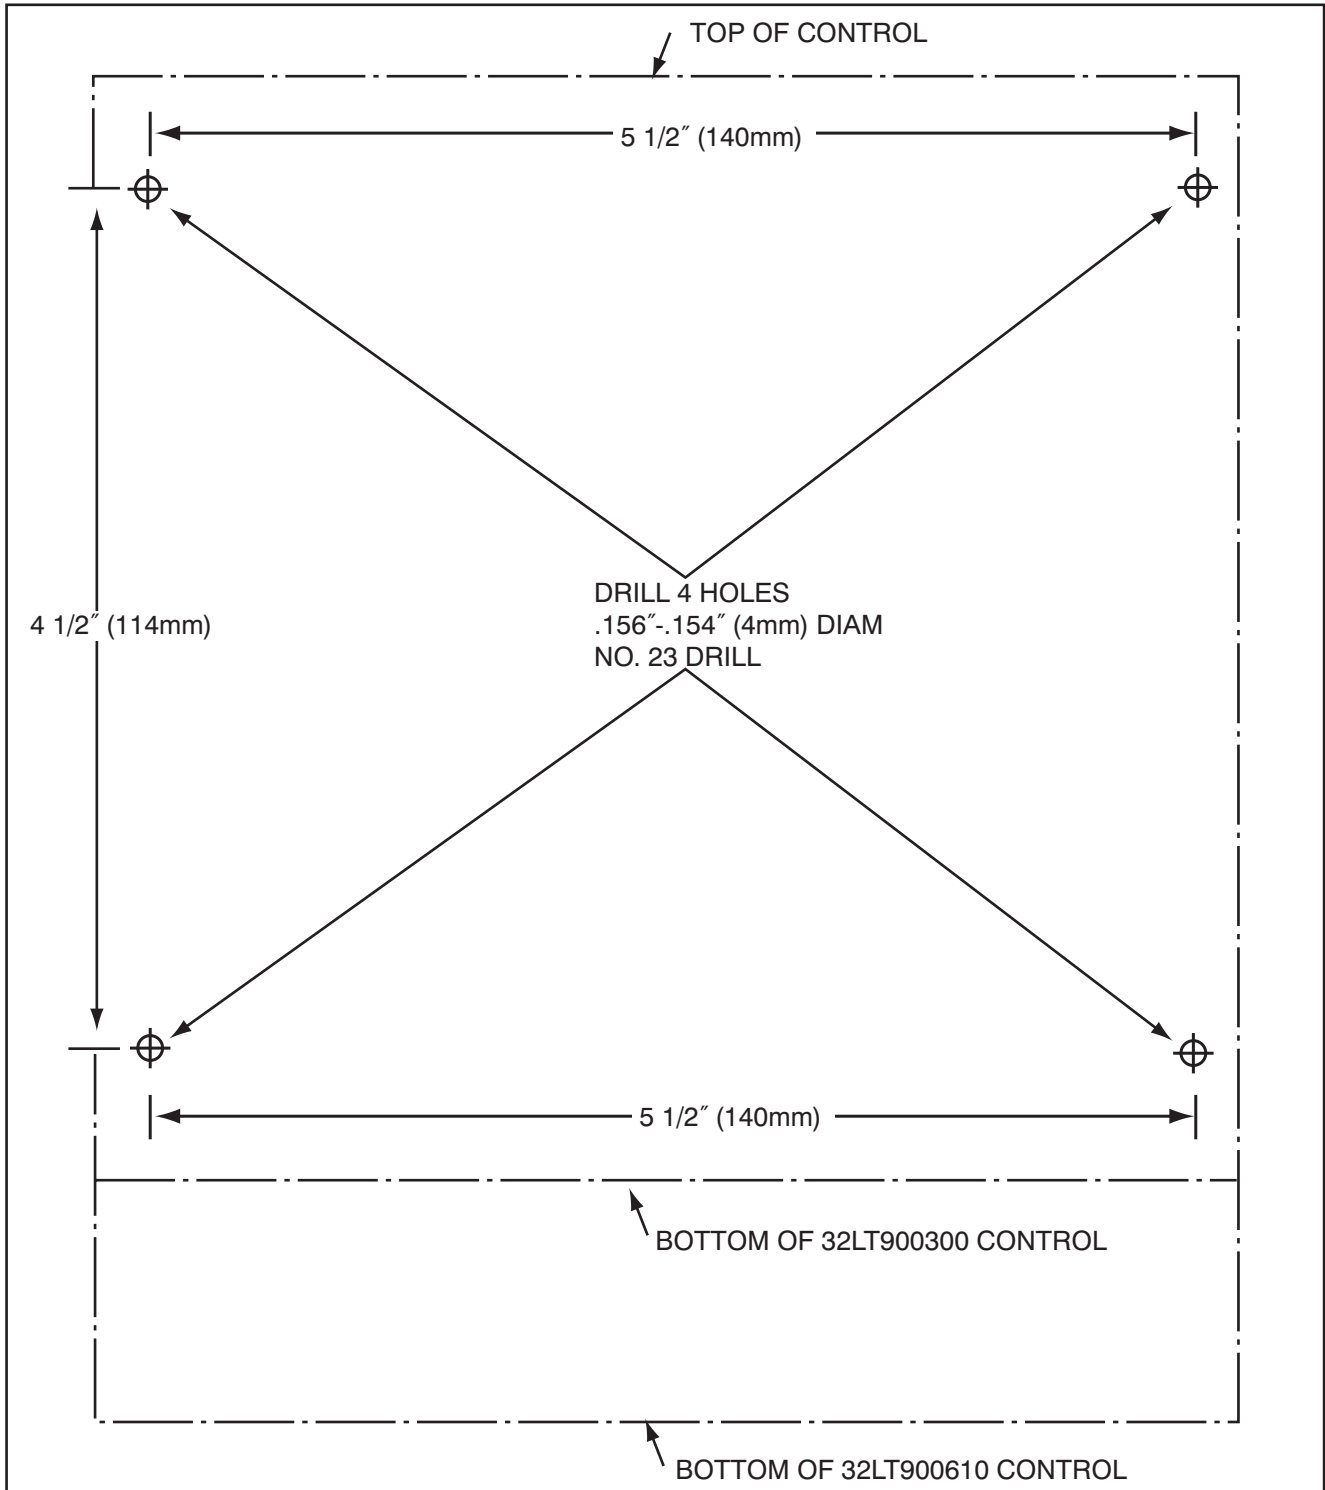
Bottom of 230V Motormaster I Controller for (300) and 460V (610)
